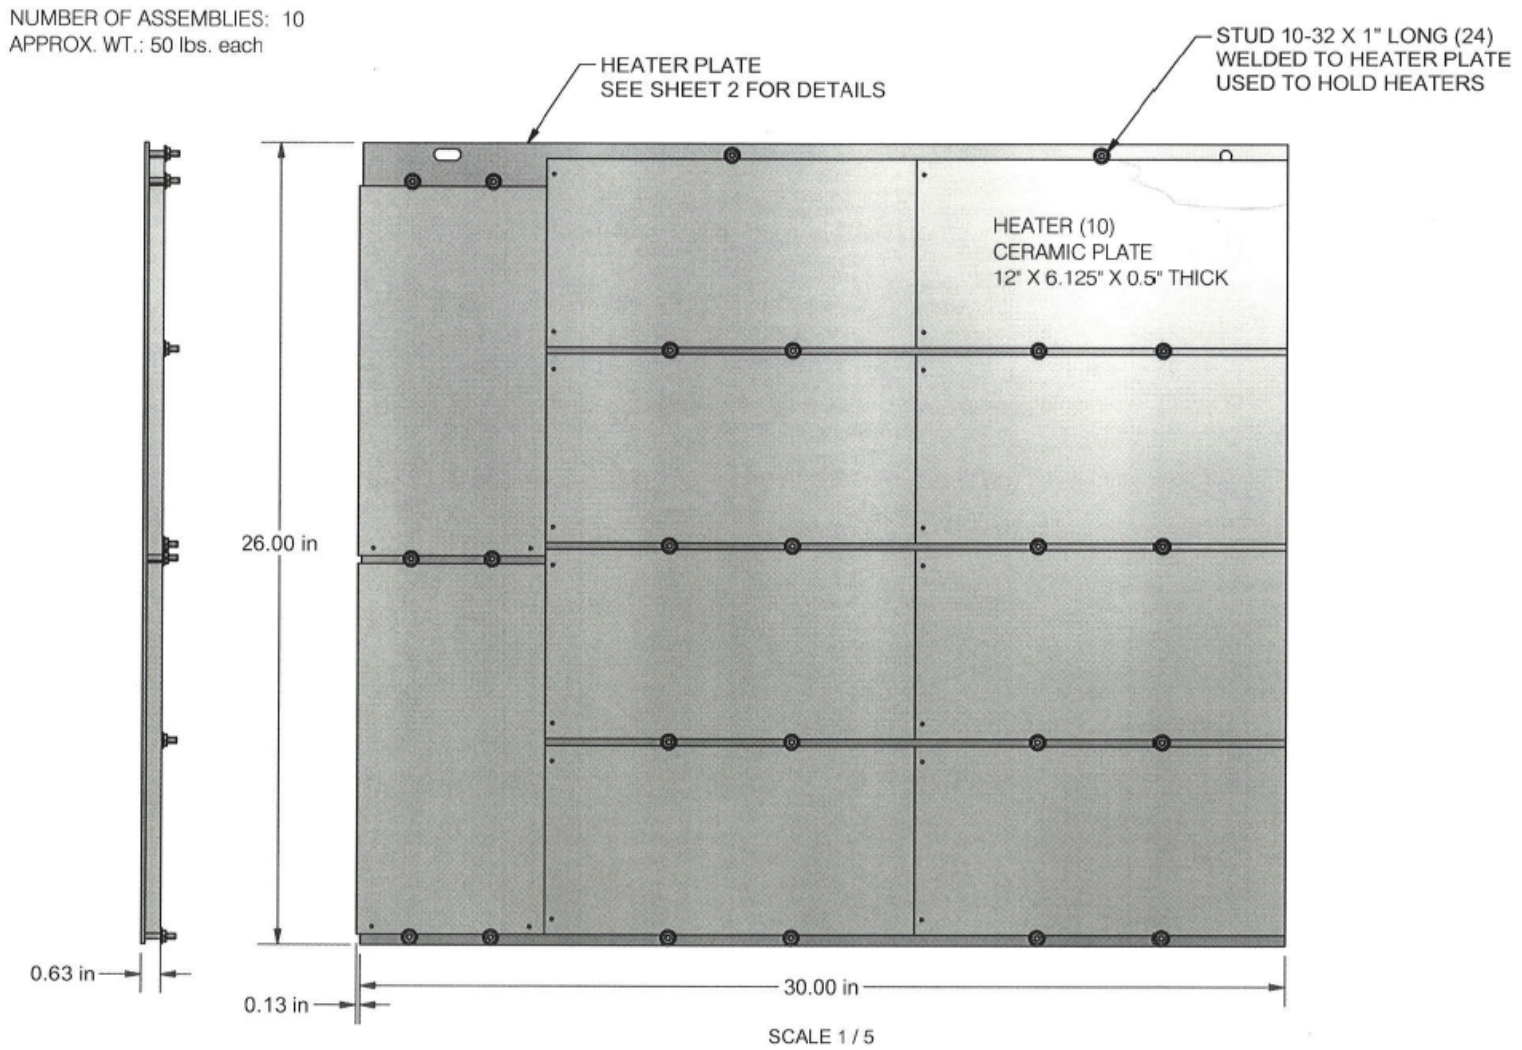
AutoCAD drawing of heater subpanel with ceramic heaters outlined
